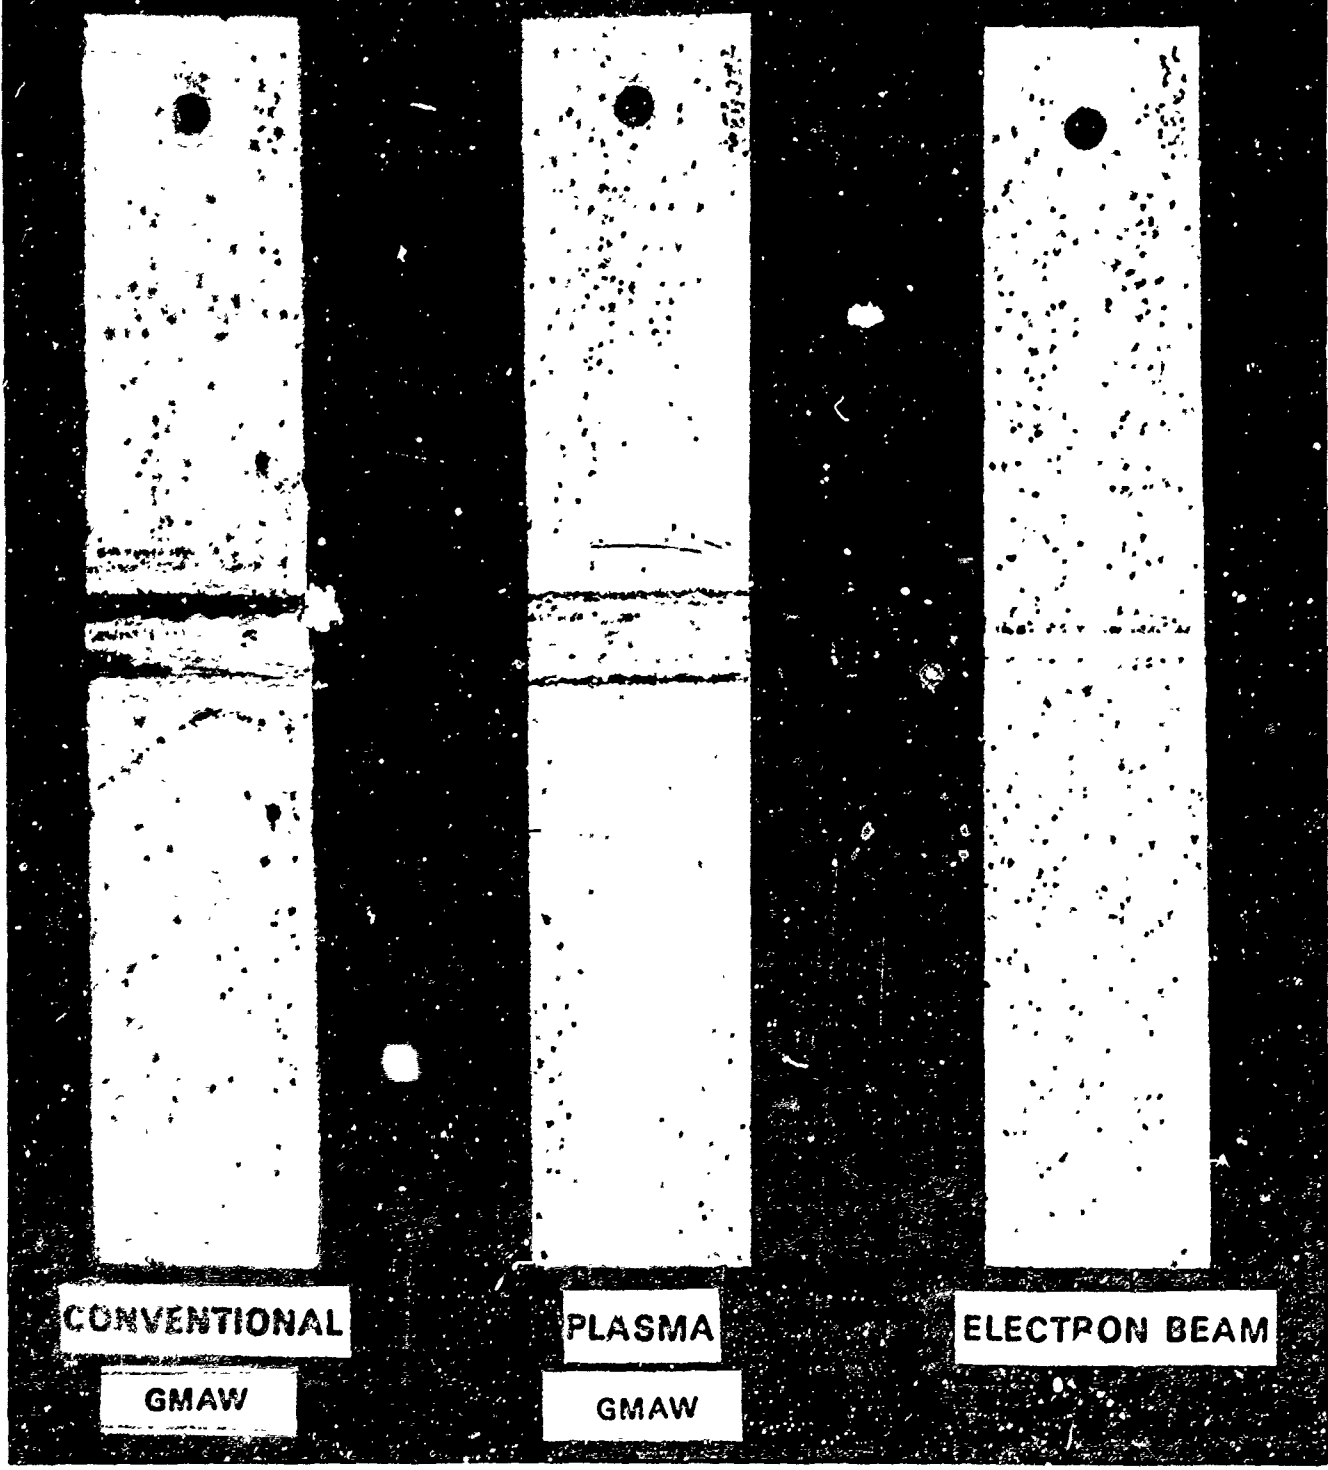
Corrosion Tests of Butt-Welded Panels
